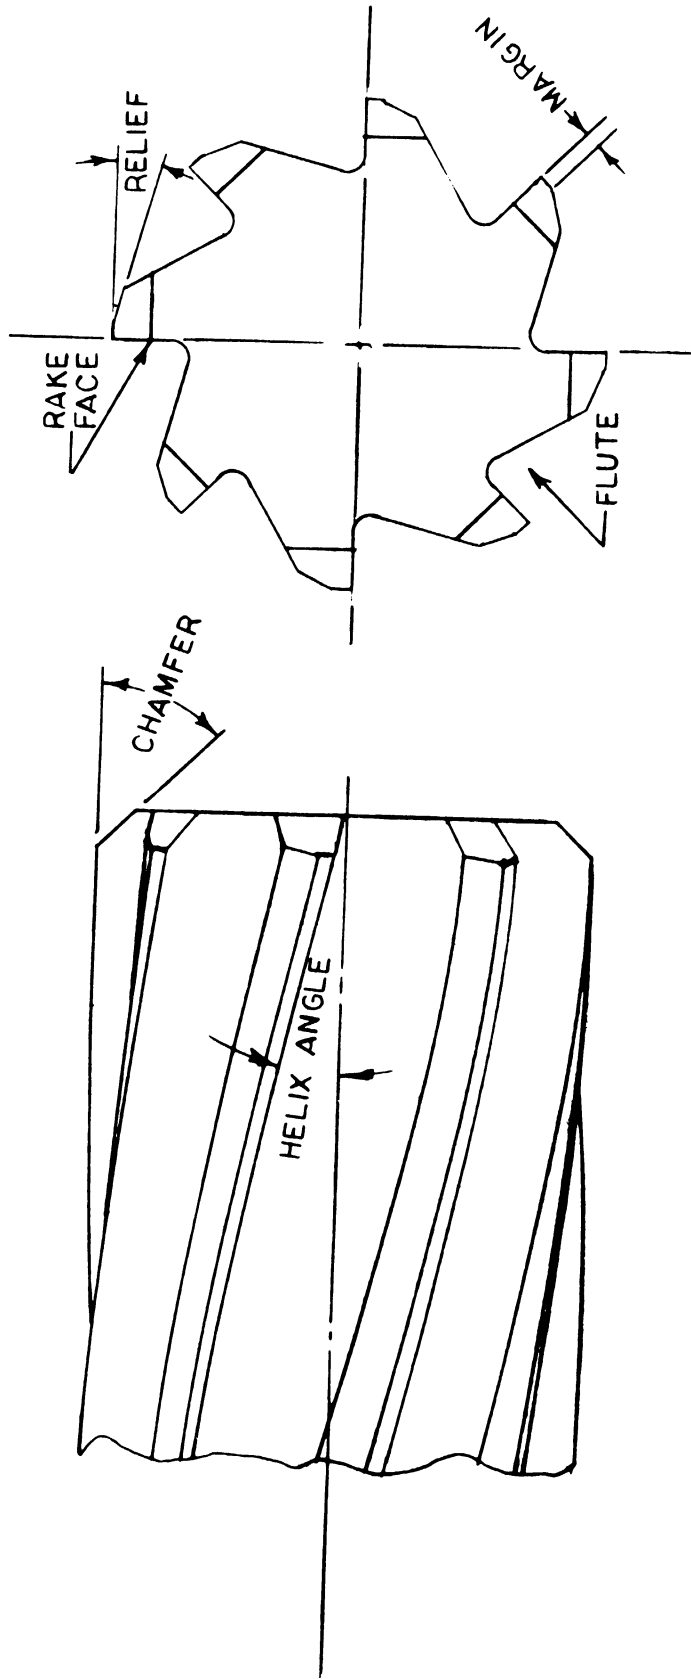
Reamer nomenclature. All cutting done by chamfer. Helix angle corresponds to rake angle of single point tool. Peripheral relief angle reduces area of contact between reamer body and hole surface.
